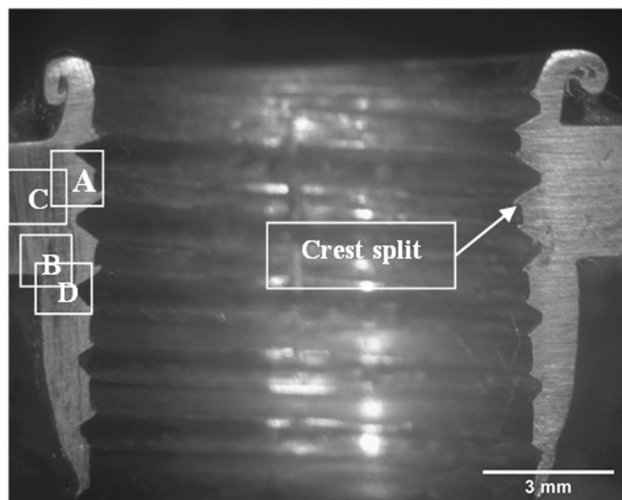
Cross-section view of formed thread M10×1.5 for specimen B (X7)
